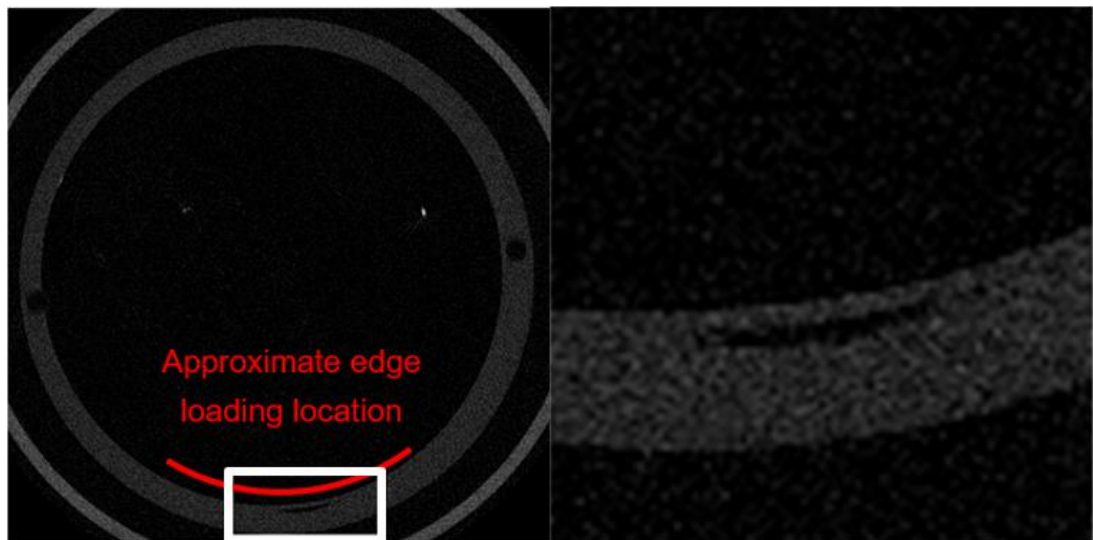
Possible subsurface damage in Liner 1 after being subjected to edge loading. The holes at the sides of the liners were intentionally drilled and used to align CMM measurements.
